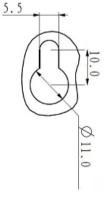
Dimensions: Keyhole in detail (KBox C-101-2 with fan tray option)
